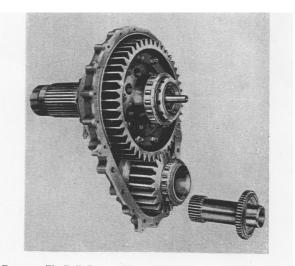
The Rolls Royce "Merlin" engine airscrew reduction gear, which is similar in principle to that shown in Fig. 233.
